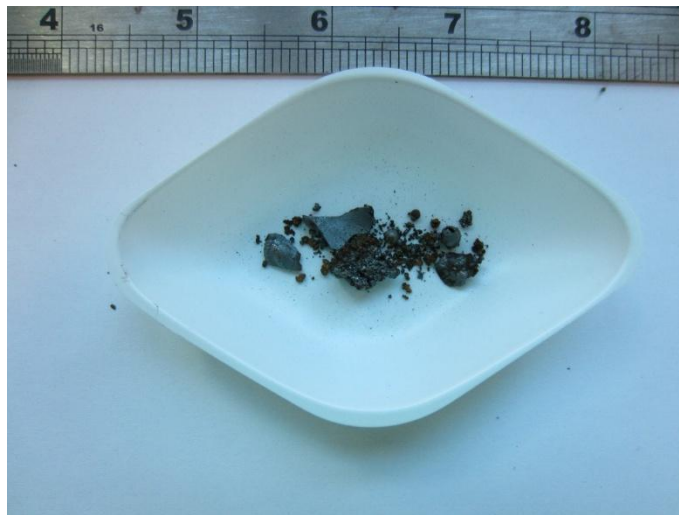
Sample [REDACTED] smaller weld spatter.
